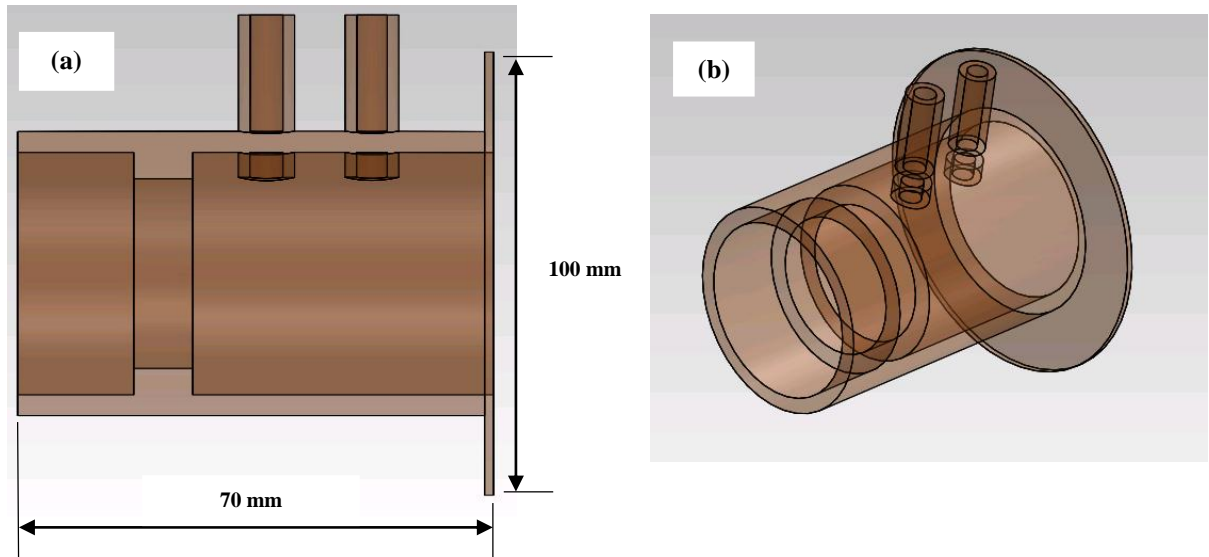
(a) Outlet housing part 1; (b) Outlet housing isometric view.
